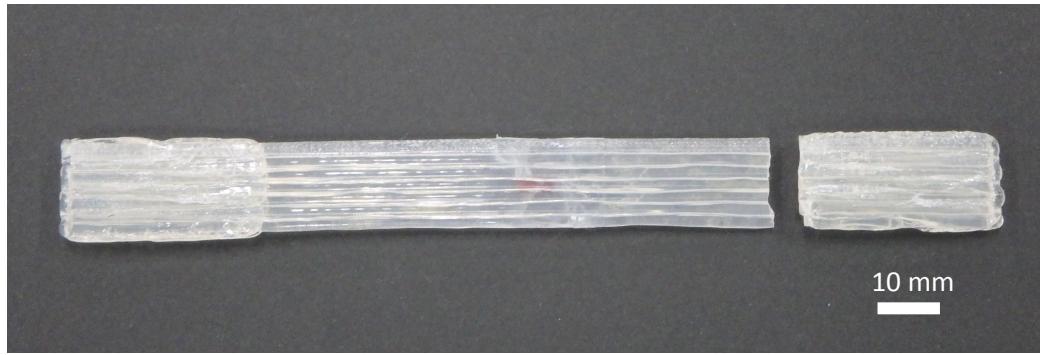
PLA specimen fabricated by 3D printing after the tensile test.
